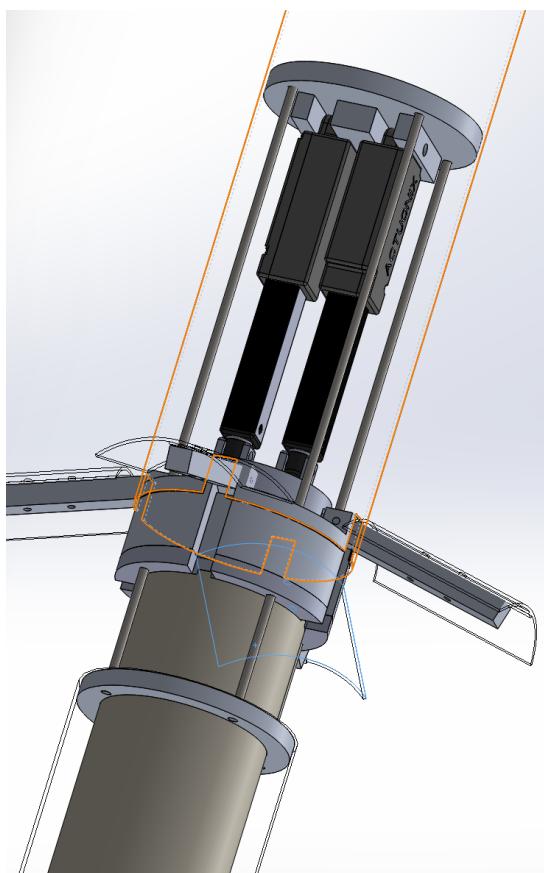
Thrust plate, Centering Ring, and Drag mechanism assembly
